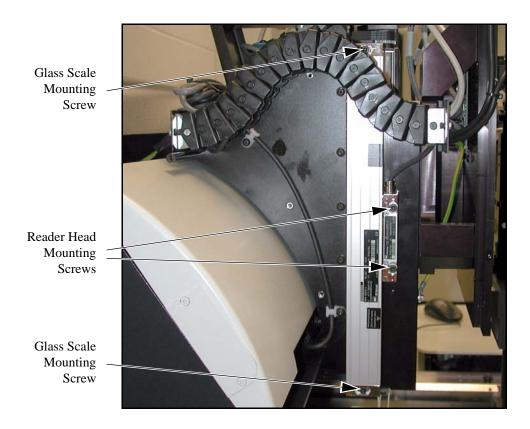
Removing the Z-Axis Glass Scale and Reader Head
